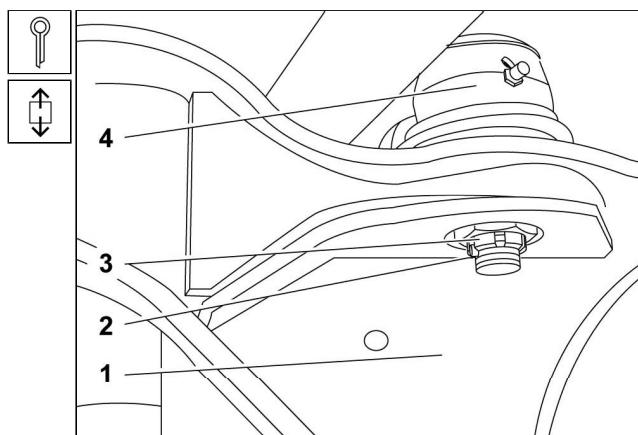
Connection of steering booster joint with the front cross girder - removal
